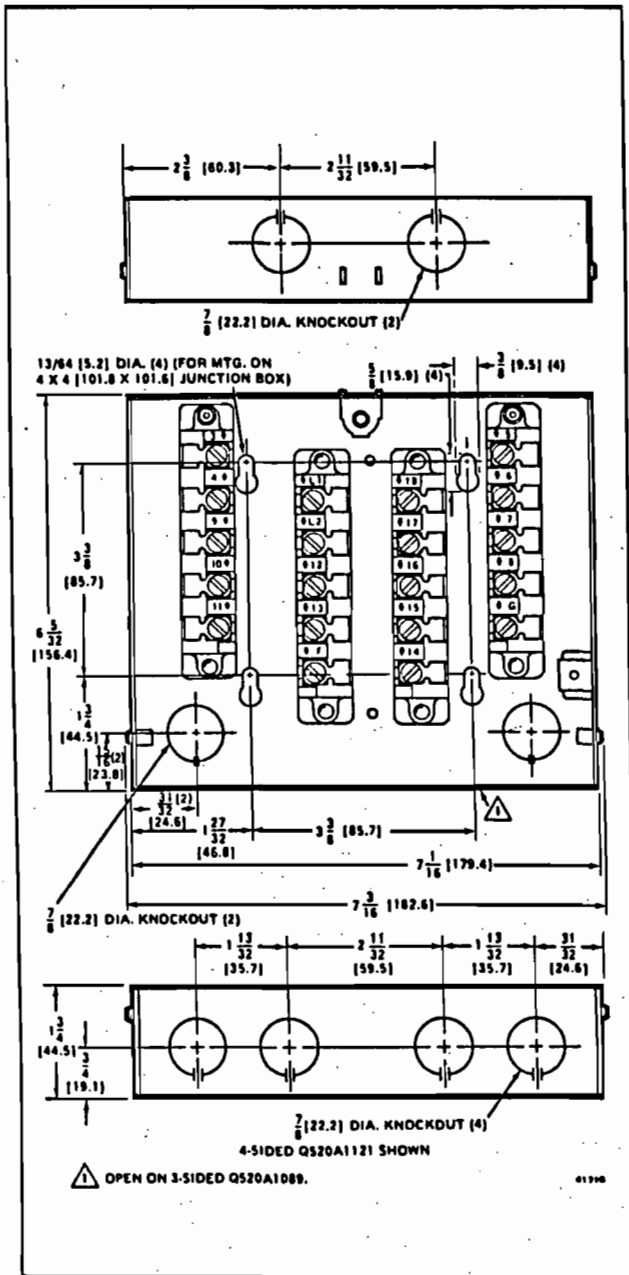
MOUNTING DIMENSIONS OF THE Q520A WIRING SUBBASE, IN in. [mm SHOWN IN BRACKETS].
